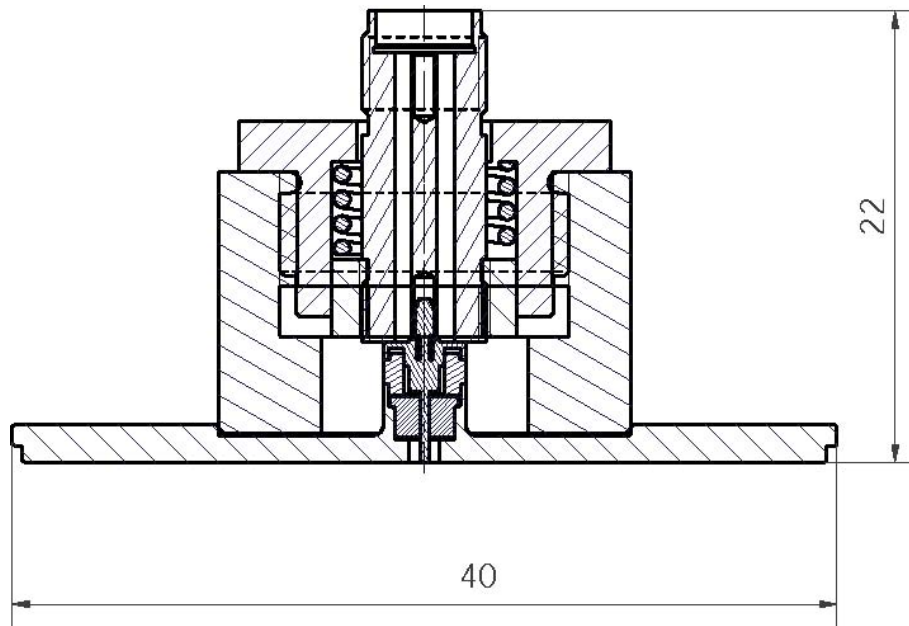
Technical drawing of the coaxial RF pick-up (the dimensions are in mm).
